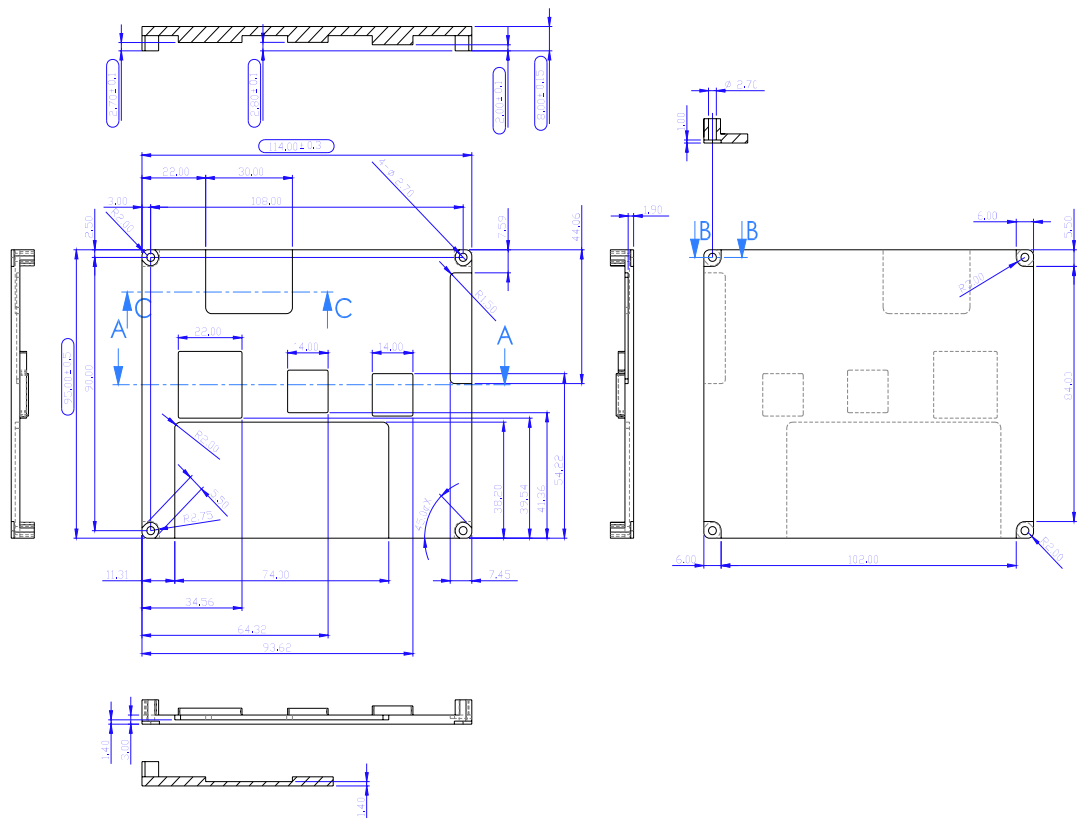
Drawing of Heatspreader for BGA type CPU
